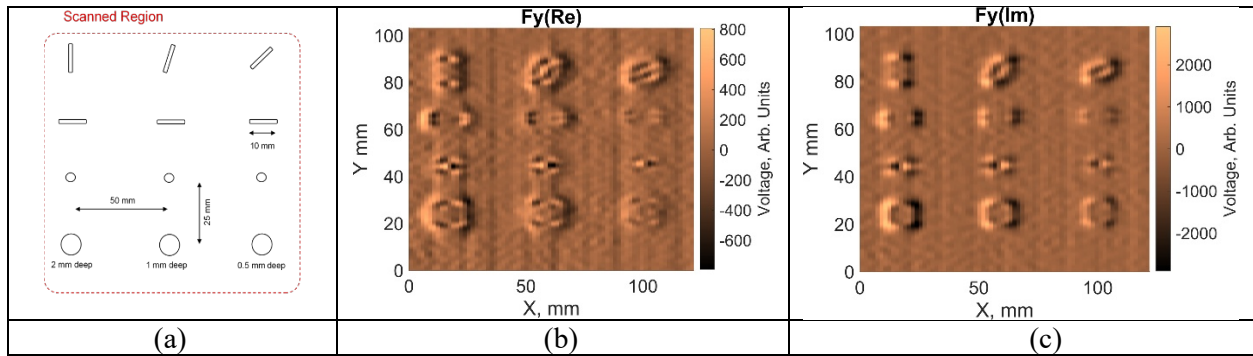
C-scan of the calibration CFRP sample using the sensor array E-2a, bottom side, $f = 2$ MHz in the SDD axial mode: (a) locations of defects; (b) y-gradient of the real part; (c) y-gradient of the imaginary part.
